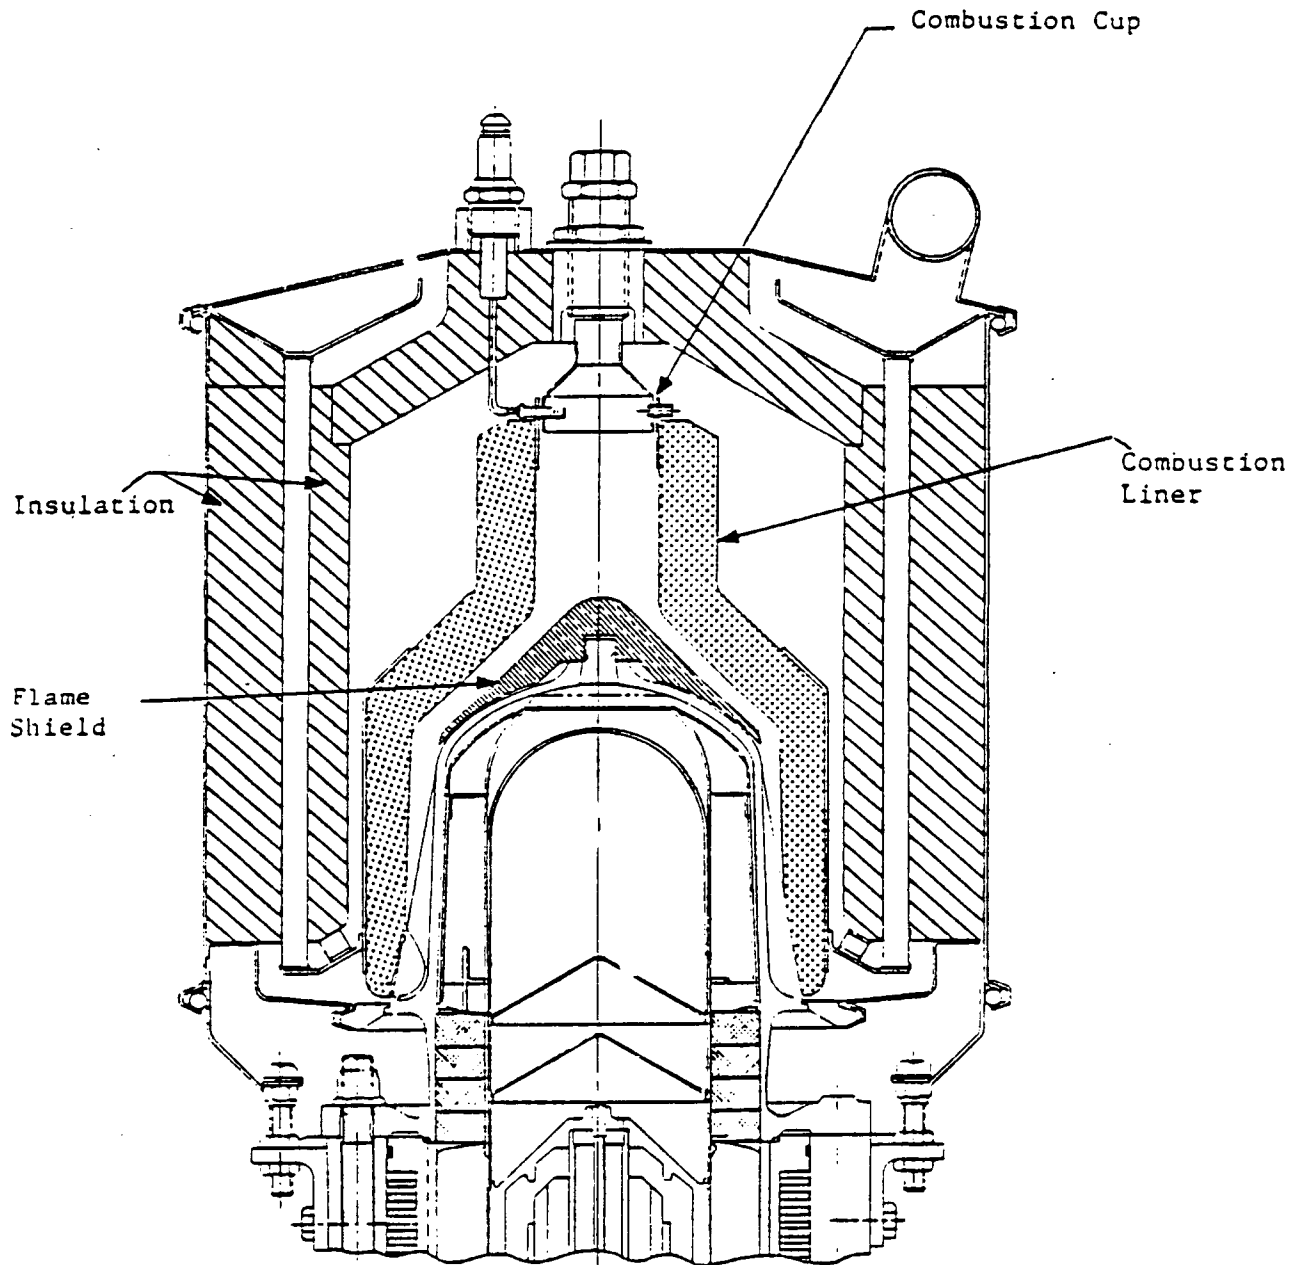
DRAWING OF MTI EXTERNAL HEAT SYSTEM
